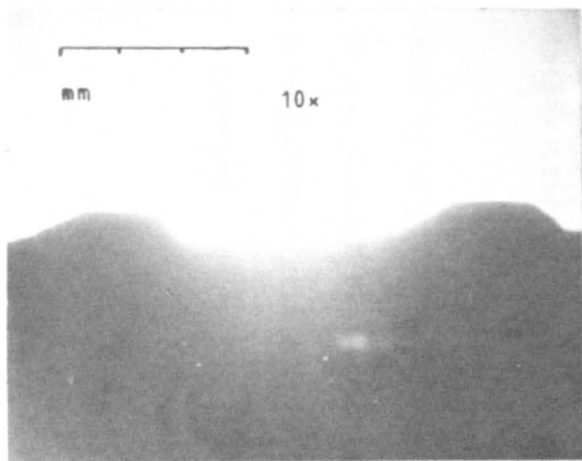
SPECIMEN 6C - INTERNAL CRACK,
